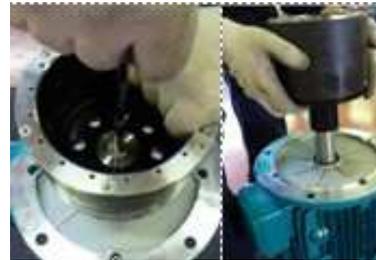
Undo the screw (918) with washer (555) from the electric motor shaft. Pull out the outer magnet (856) from the electric motor shaft.
